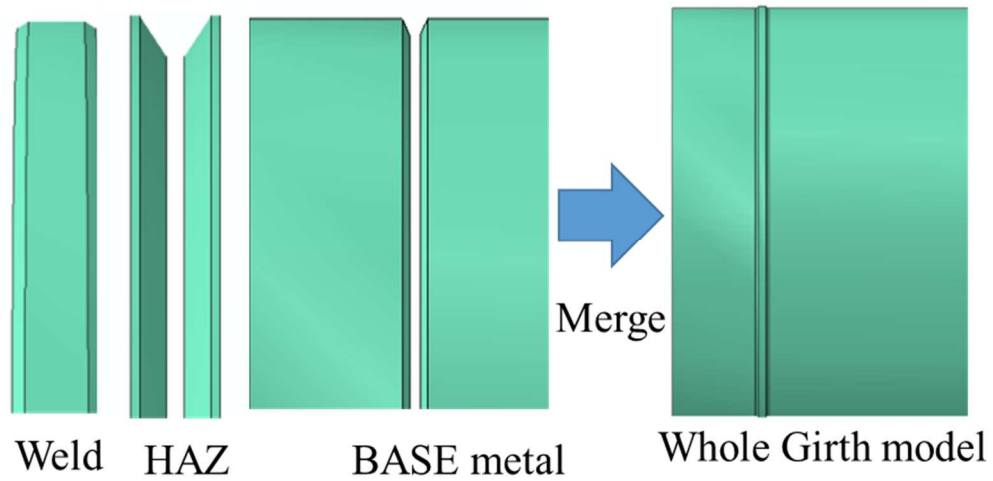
Detail modeling of crack propagation with girth weld
